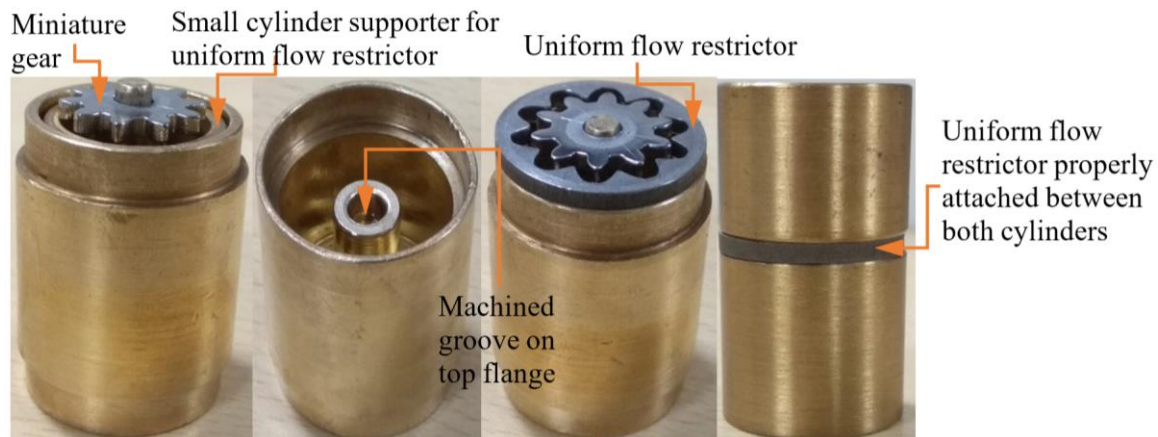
Gear, small cylinder support, uniform flow restrictor inside workpiece fixture assembly and uniform flow restrictor supported between two cylinders
